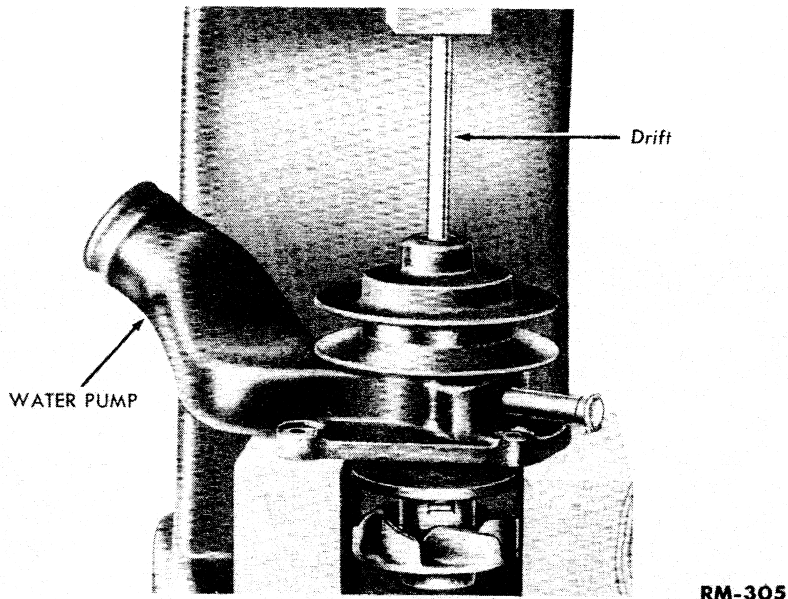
Pressing Impeller and Shaft Assembly Out of Pulley and Housing.
